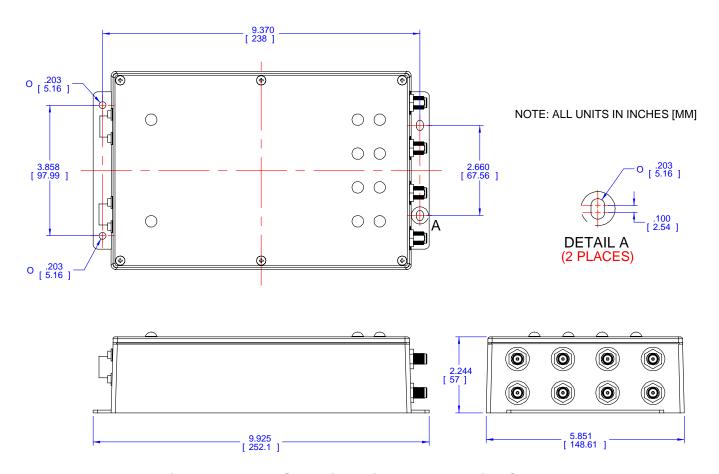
2400PSU-8 Dimensions and Mounting Centers
